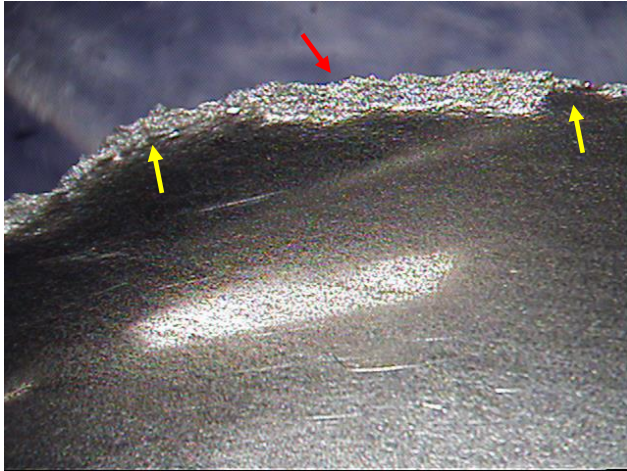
Internal surface of the cracked component after the second deep drawing step. The fracture surface (red arrow) and evidence of plastic deformation (red arrows) can be observed
